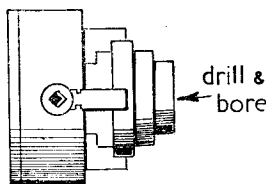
Casting held in the four-jaw chuck for machining the bore
